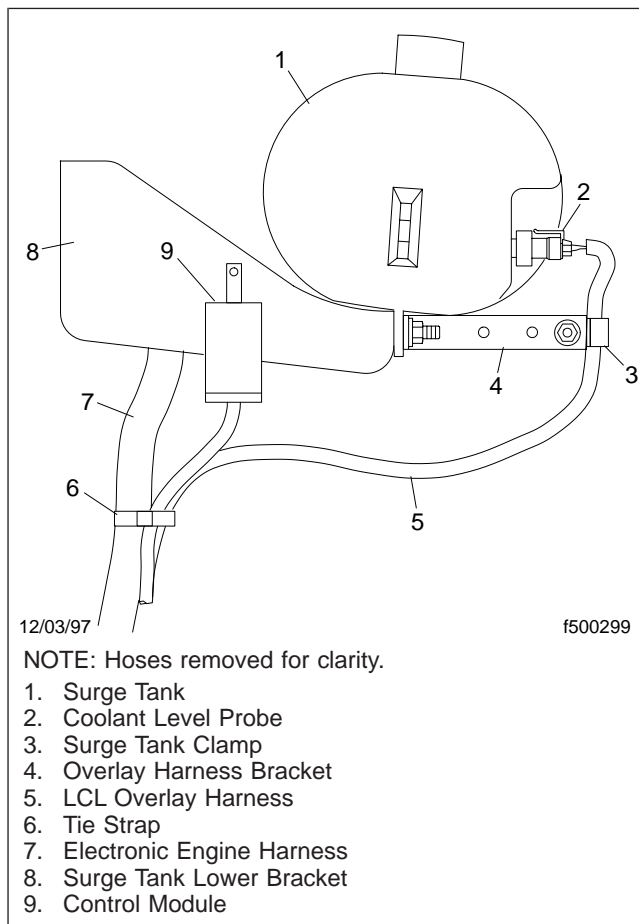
, Probe Mounted In Surge Tank, CAT/CUM Engines
